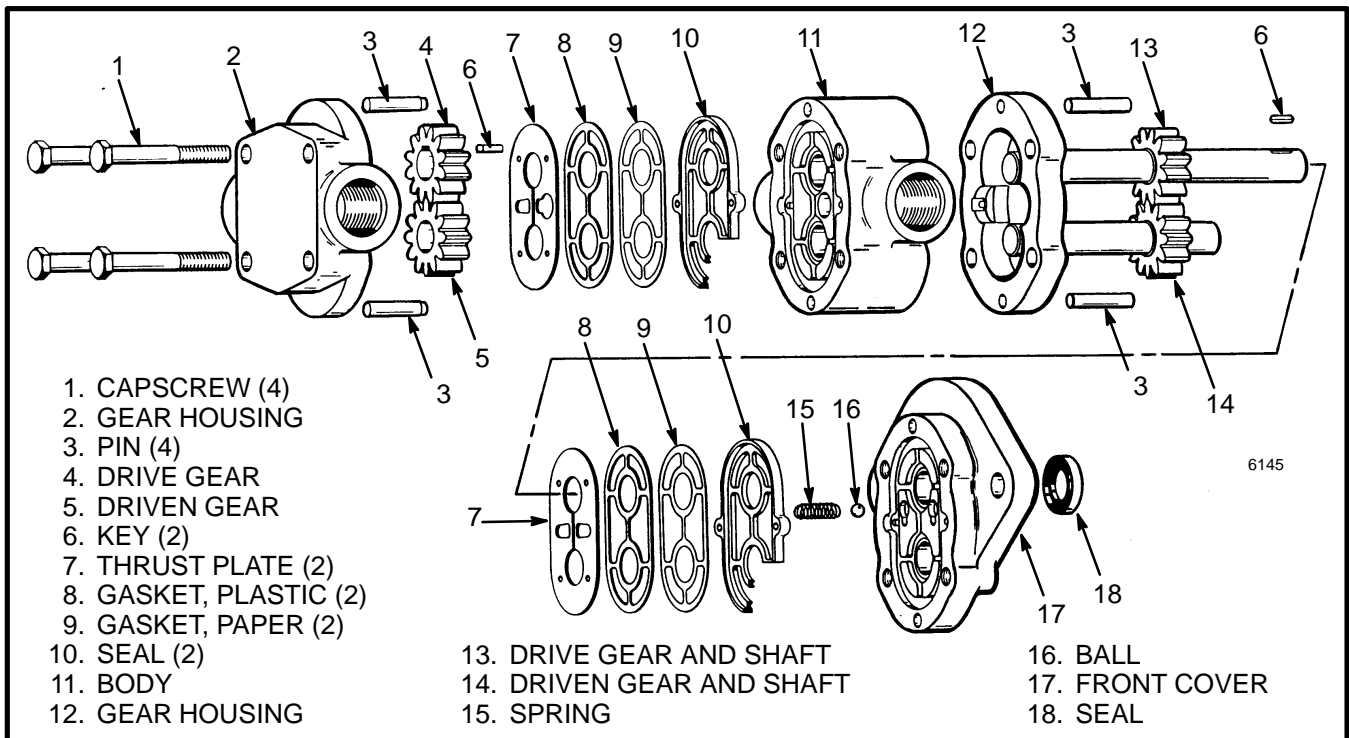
HYDRAULIC GEAR PUMP, TANDEM
